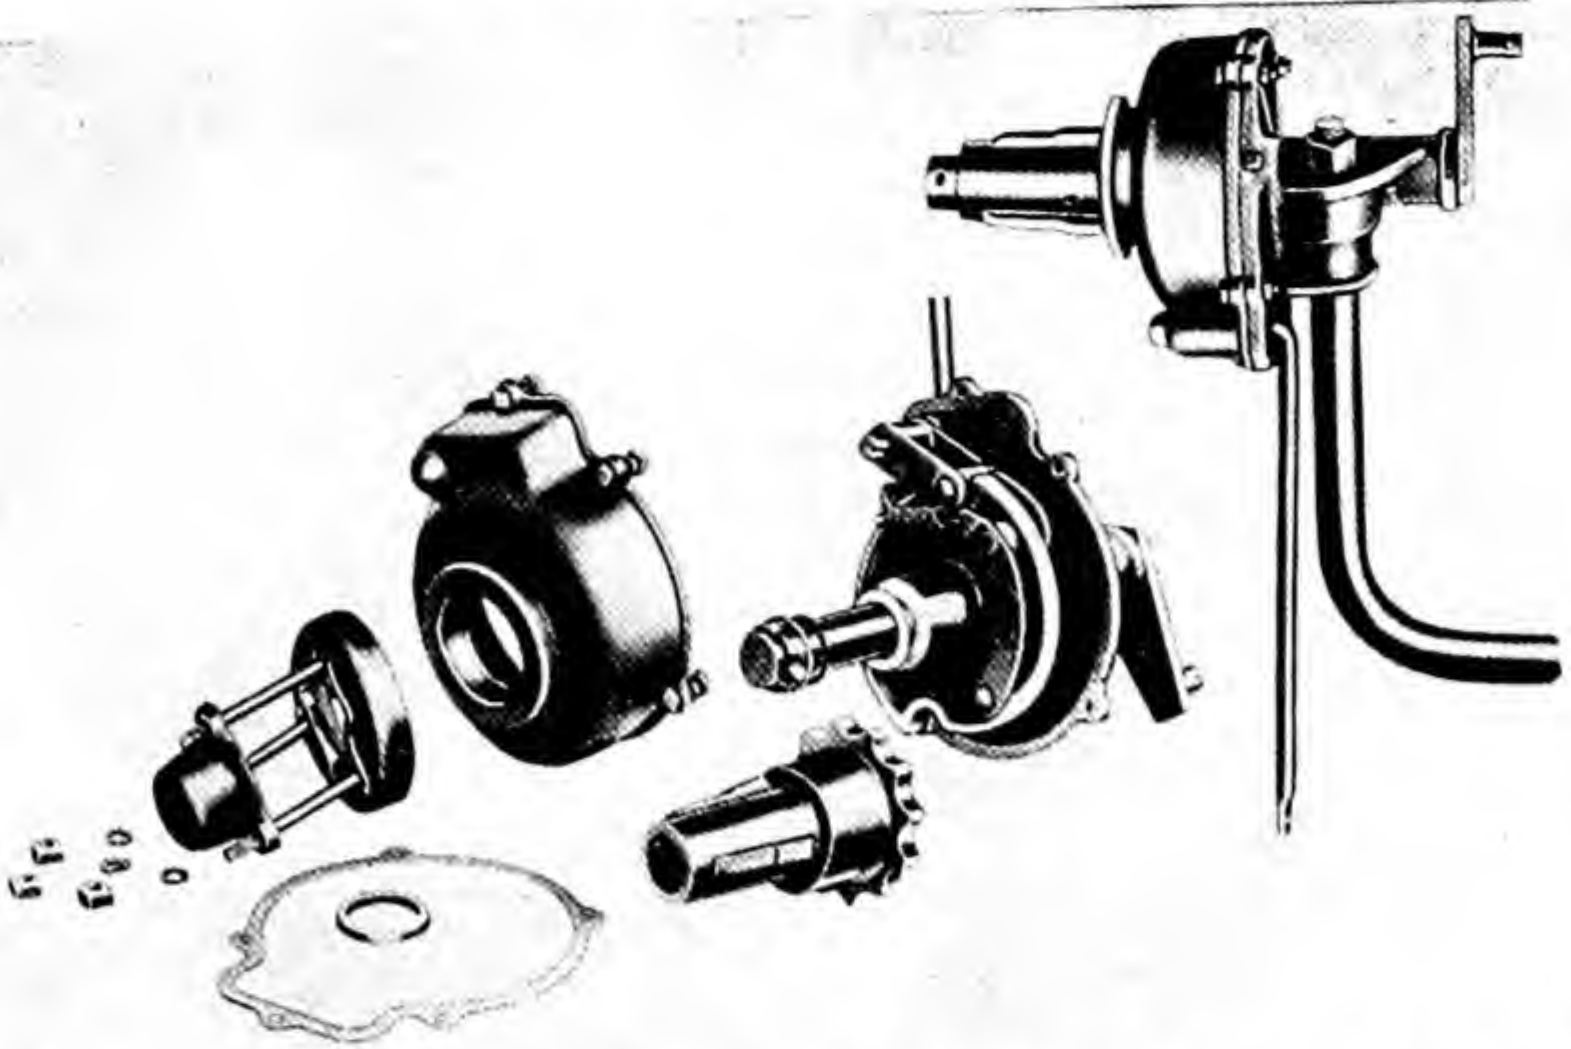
Enclosed power lift assembled and "exploded" to show various parts.
